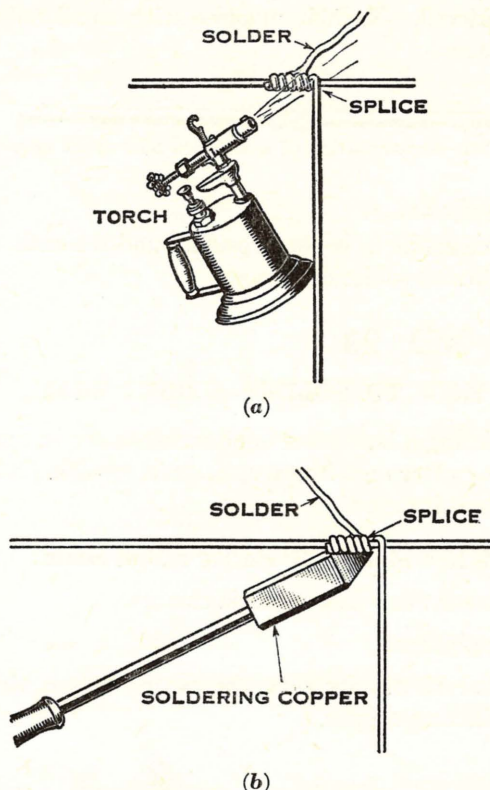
Soldering a wire splice. (a) With a torch. (b) With a soldering copper
